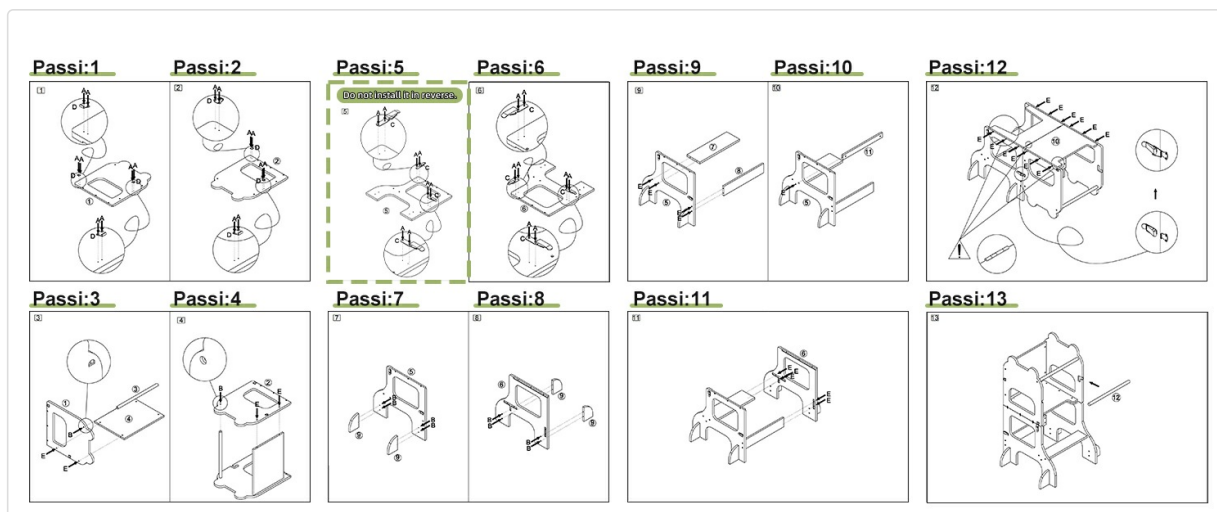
Exploded view of the labebe Montessori Learning Tower components, including wooden panels, support bars, and various screws and fasteners. Each part is numbered for easy identification during assembly.
